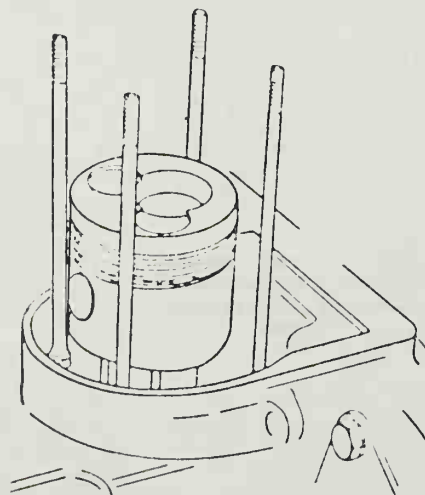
Install piston so indentations in crown are positioned as shown.
